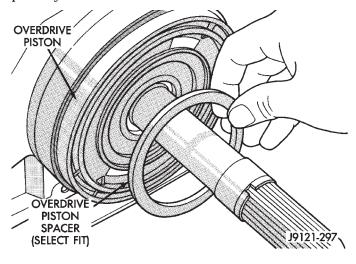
Overdrive Piston Thrust Plate Removal/Installation
